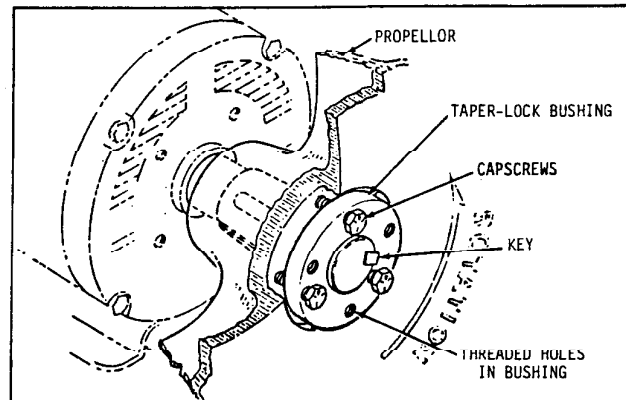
CUTAWAY DRAWING OF TYPICAL PROPELLOR INSTALLATION
